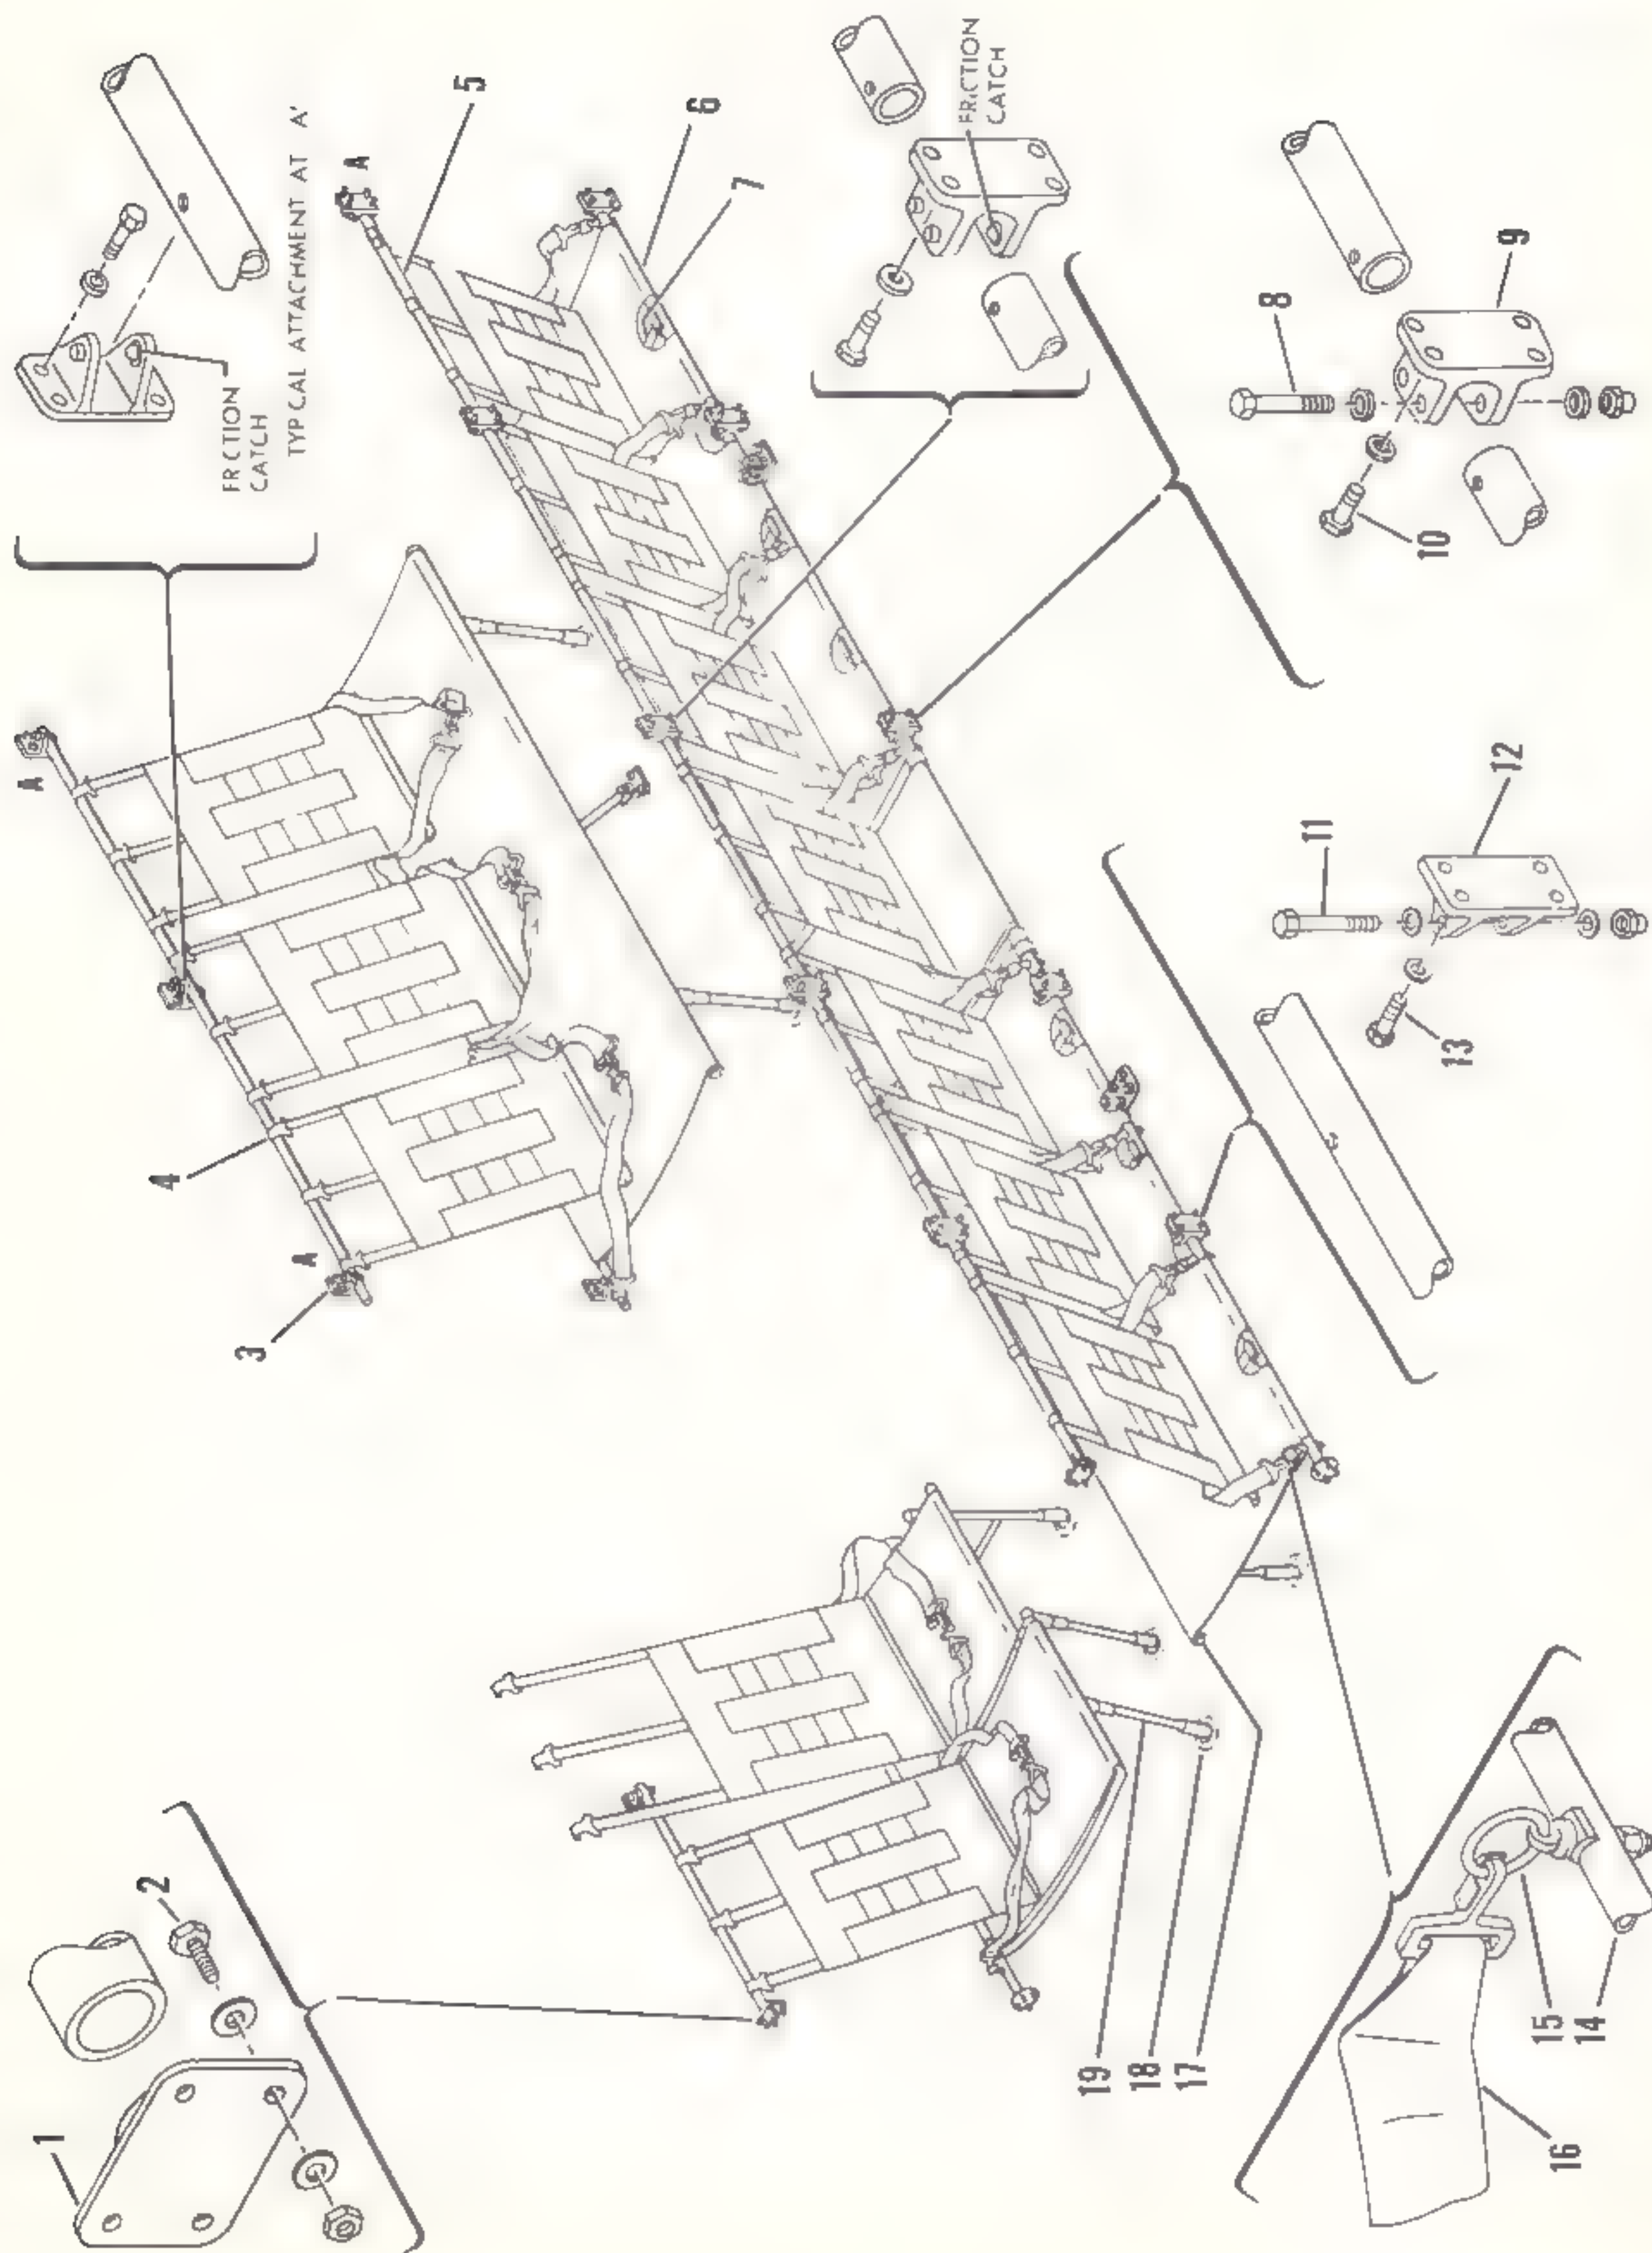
Twelve-place troop seat installation (Sheet 2 of 2)
